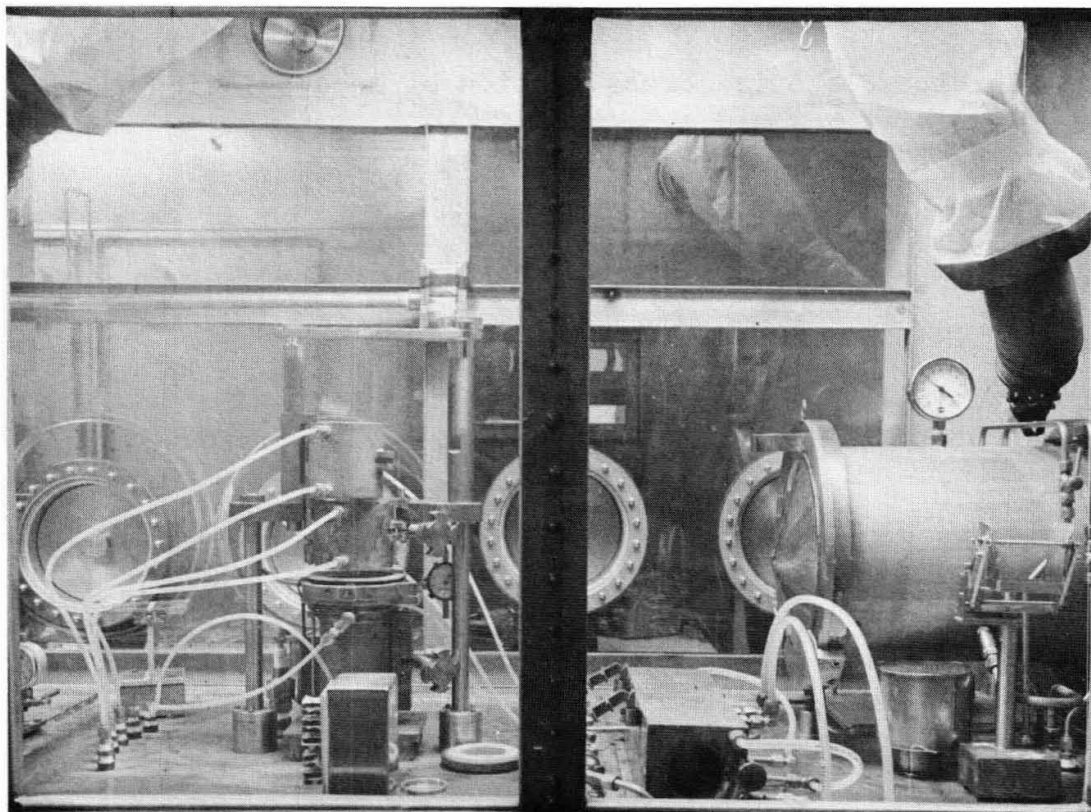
Box 8 - typical TIG welding fixture
